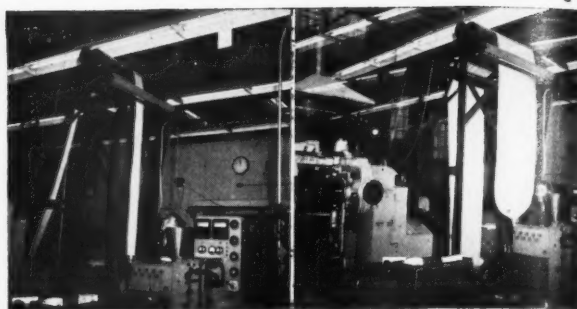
At Start of Extrusion Operation, Leading End of Tube Is Passed through Squeeze Rolls Which Provide an Air Seal
